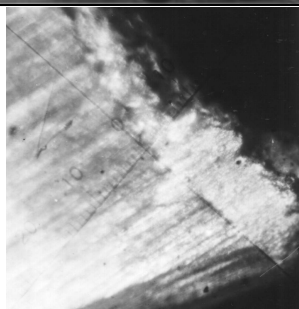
Deposit on the front of cutting edge after cut with $v = 710\text{m/min}$
